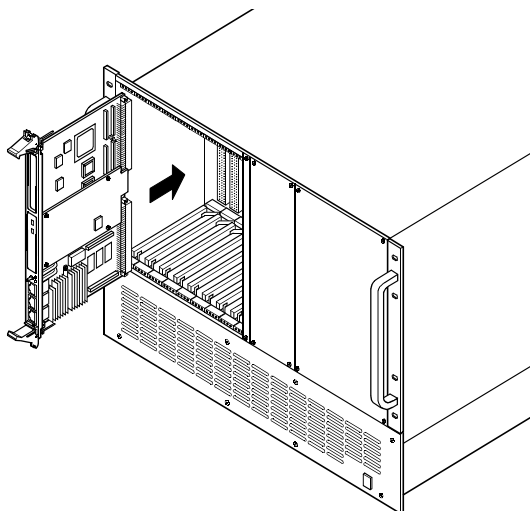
MVME5100 Installation and Removal From a VMEbus Chassis
